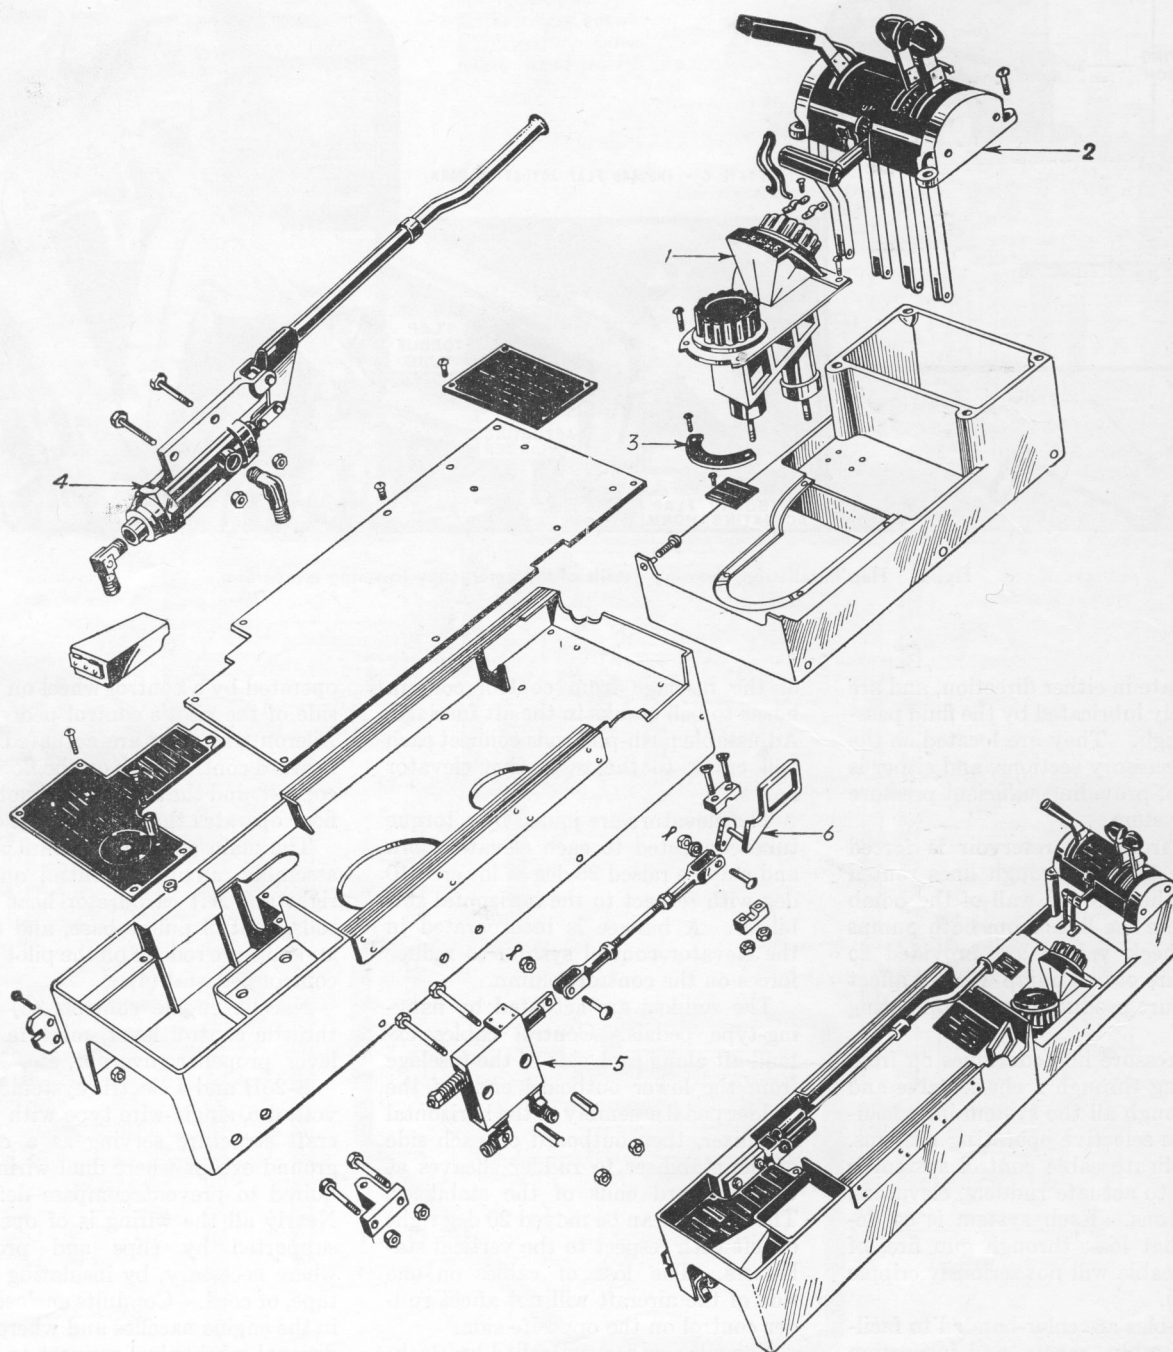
Pilot's lower control pedestal: (1) aileron and rudder tab controls; (2) hydraulic control cap assembly; (3) rudder tab indicator plate; (4) hydraulic handpump; (5) pneumatic emergency brake valve; (6) pneumatic emergency brake handle. A complete pedestal is seen at the lower right.
